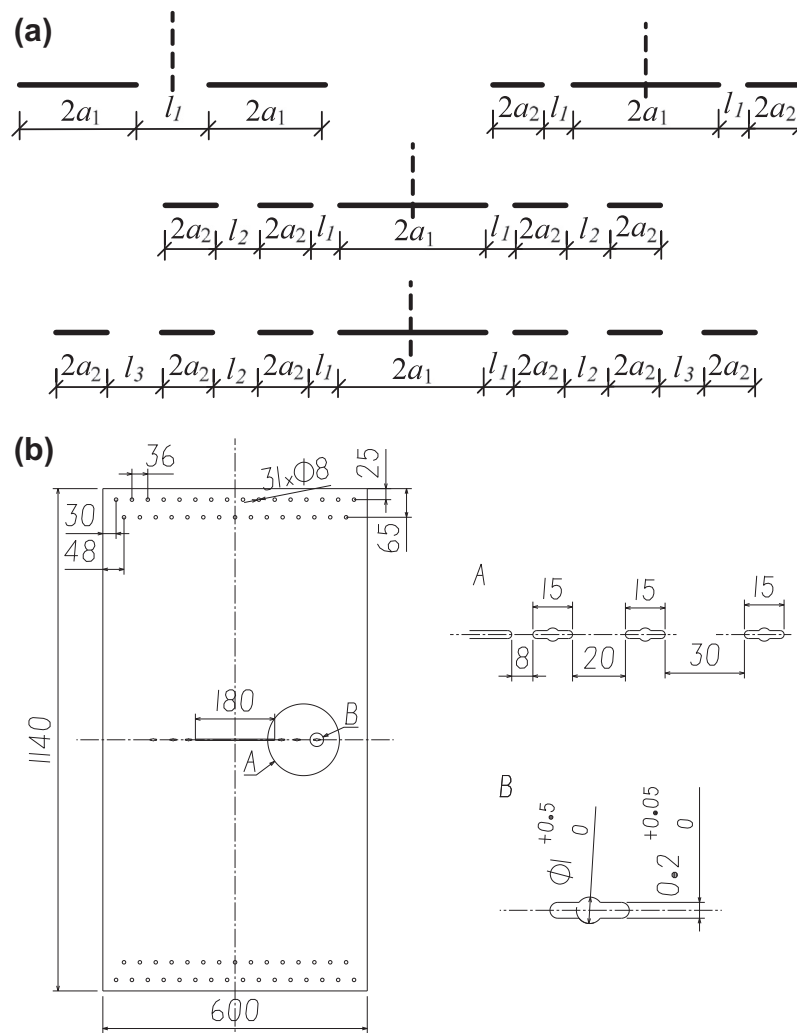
Geometry dimensions of MSD specimen. (a) Four types of MSD configurations, (b) Detailed geometrical dimensions for MSD7_8_20_30.
